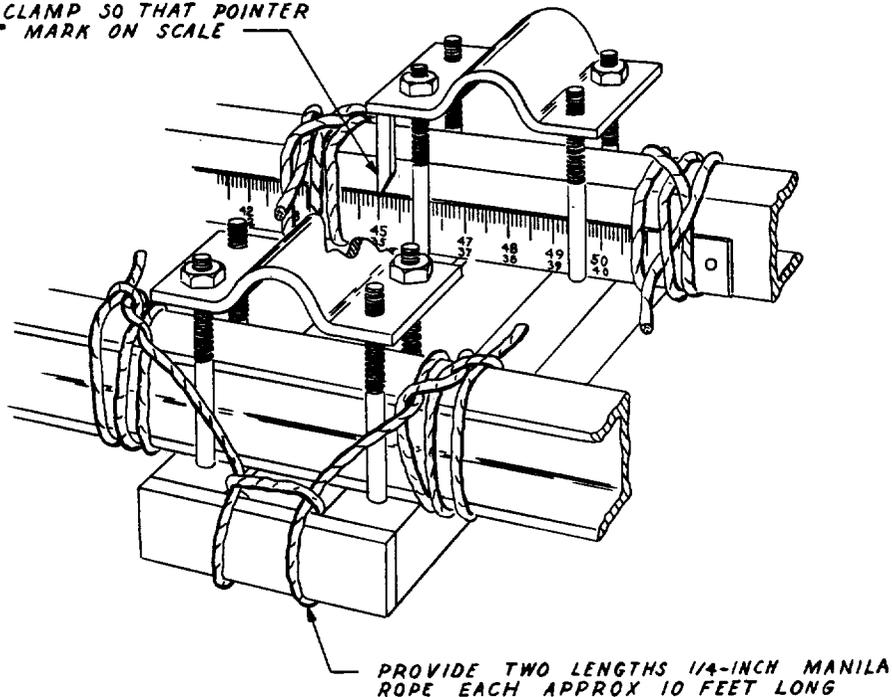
Temporary Attachment of Clamp Assembly to Lower Mount —
